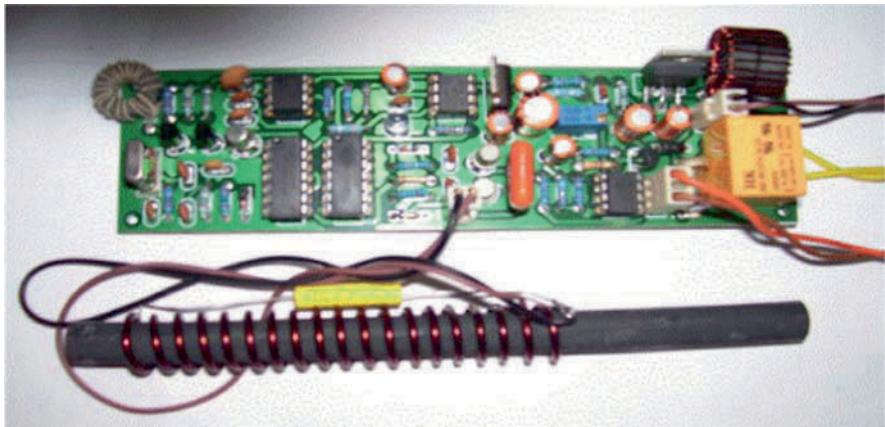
Photograph of mounted PCB for transmitter unit
